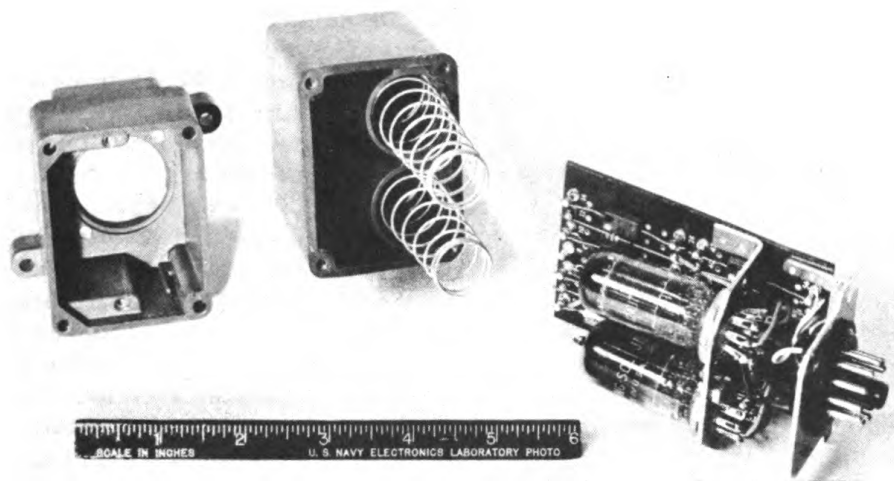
Internal construction of Model I Series packages. Each package consists of the base, the cover with the tube retaining the springs, and the parts board and brackets. The circuit shown is the two-stage binary flip-flop.
